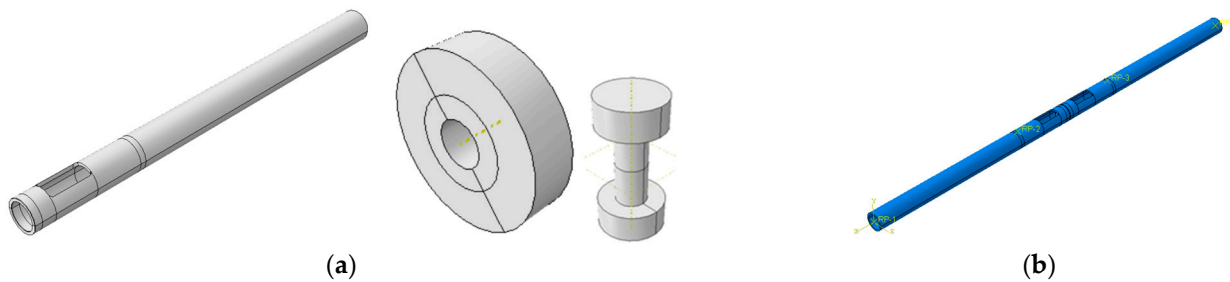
Finite element model for CHS: (a) individual parts; (b) assembly.
